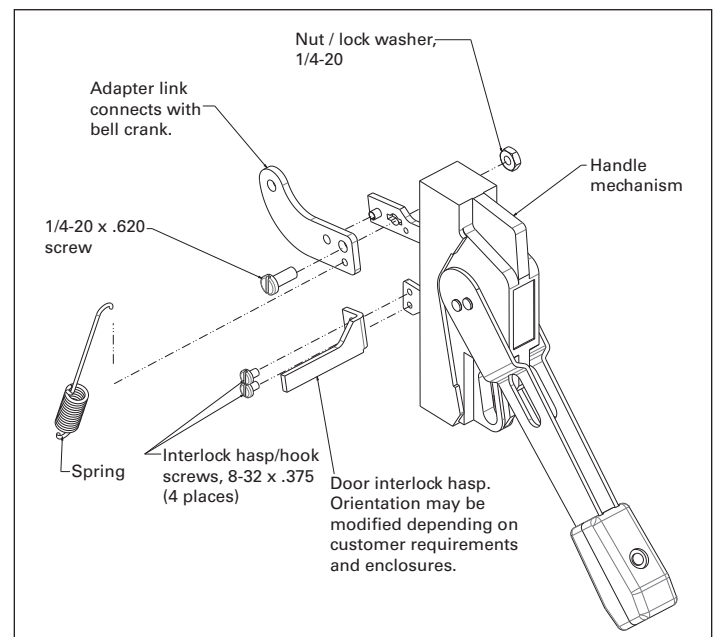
Securing the actuator mechanism to the breaker, toggle mechanism, and handle to enclosure.
